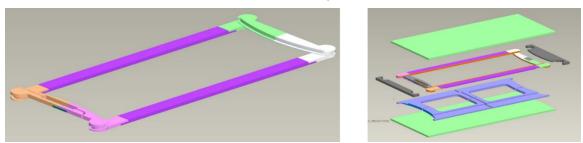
Coil winding form (left) and exploded view of tooling showing gaps in (blue) reaction frames (right).
